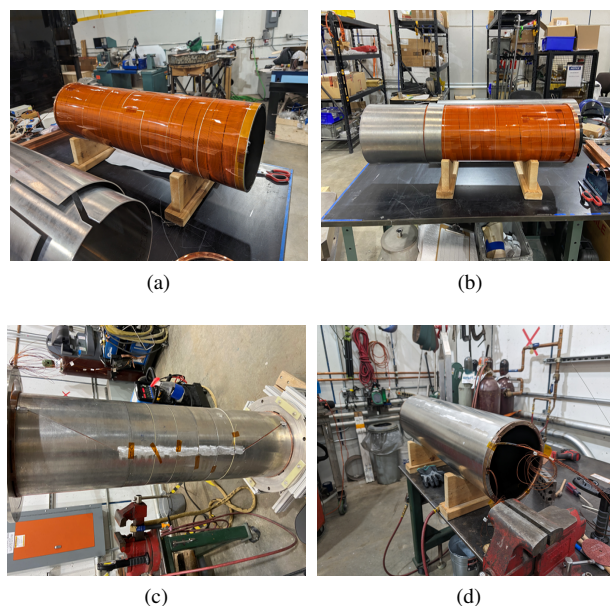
a) Coil after being wrapped in fiberglass and kapton. (b) Test Fitting of bands for impregnation form. (c) Completed welding of first layer bands. (d) Completed welding of second layer shell.
